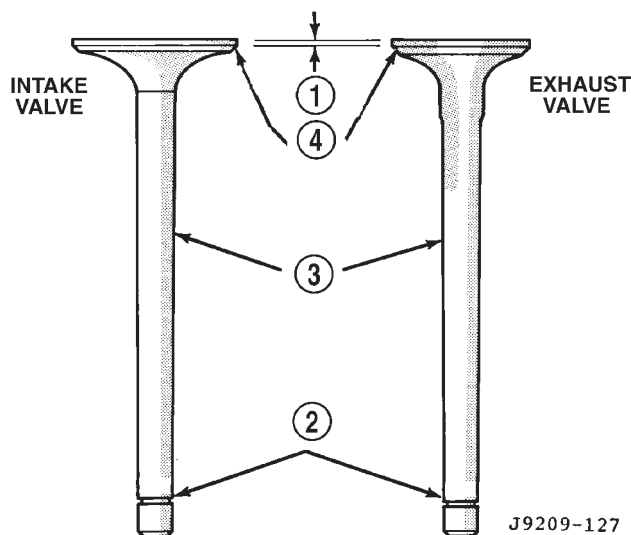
Intake and Exhaust Valves—8.0L Engine
